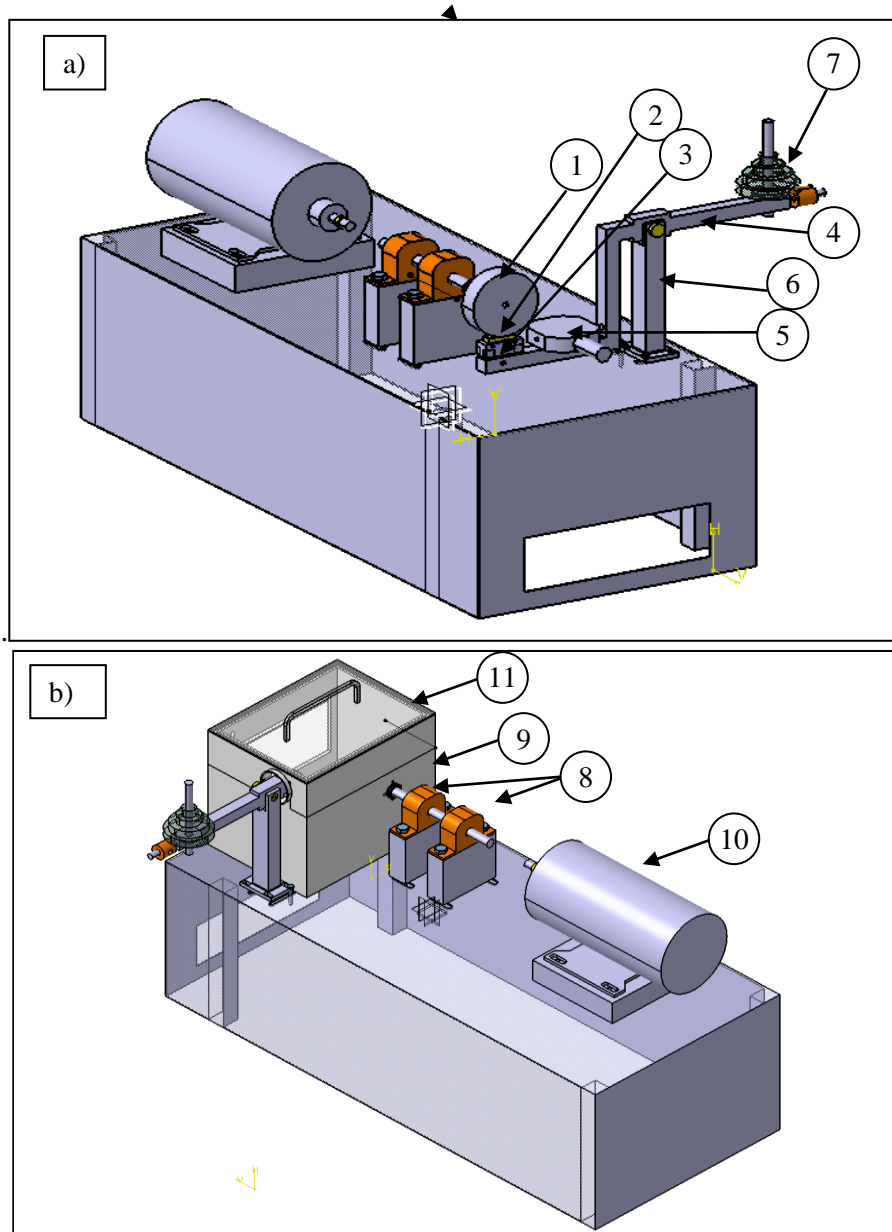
Three-dimensional view of the hybrid tribology machine
